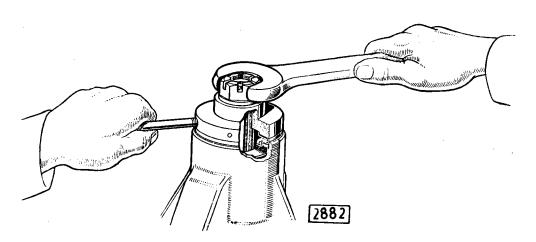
Fitting the pinion oil seal using Tool Part No. SL.4.
